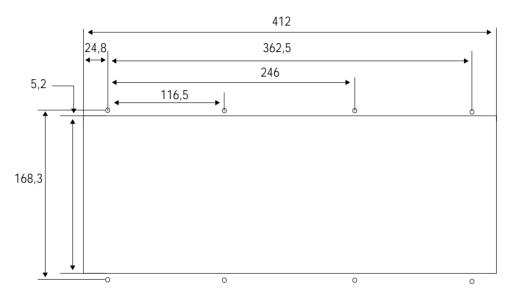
Location of attachment points for frame mounting (EPAC 3100)
